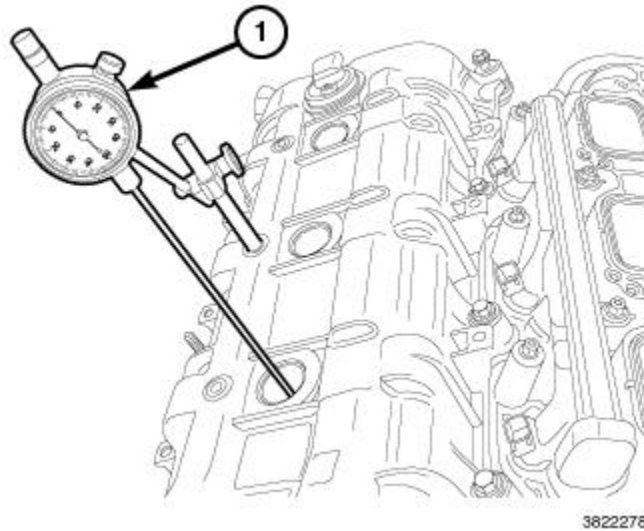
Mount Dial Indicator Set To Stationary Point On Engine
